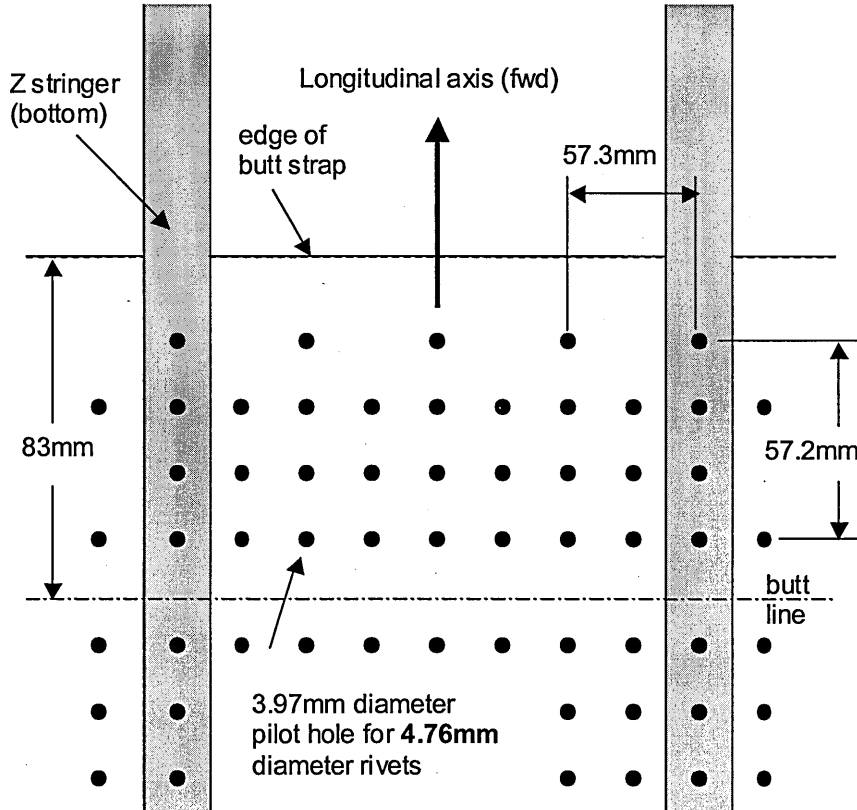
Internal Plan View & Dimensions of FS1045 Butt Joint
